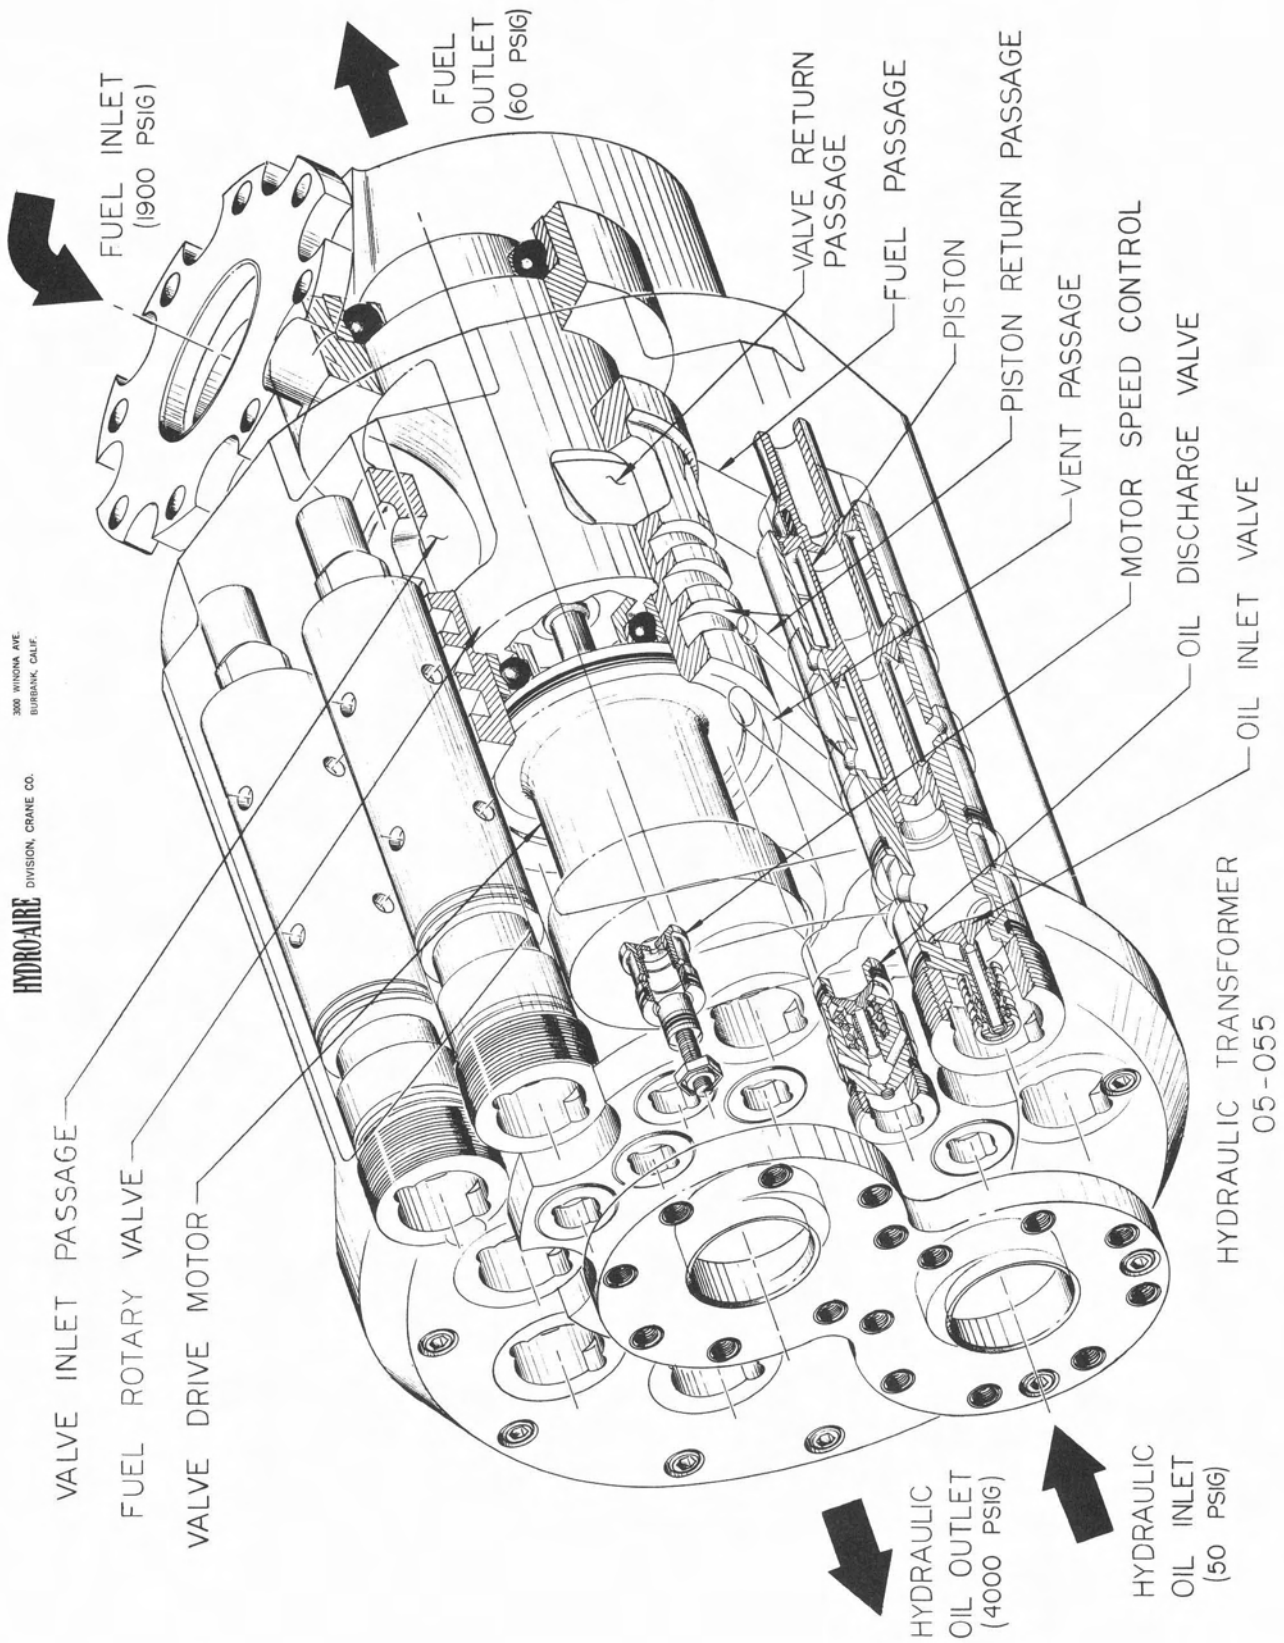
CUTAWAY VIEW OF HYDRAULIC TRANSFORMER
